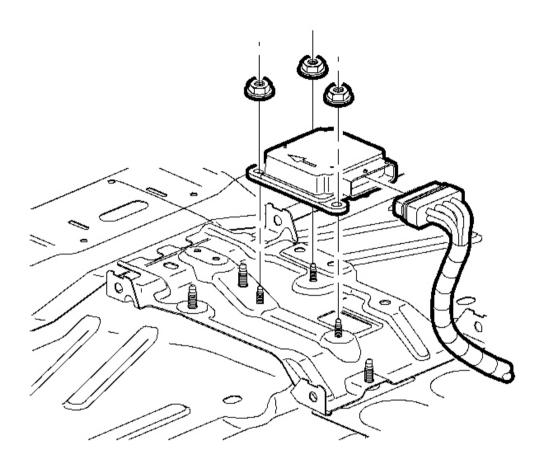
CPA Electrical Connectors, Nuts & SDM Courtesy of GENERAL MOTORS CORP.
